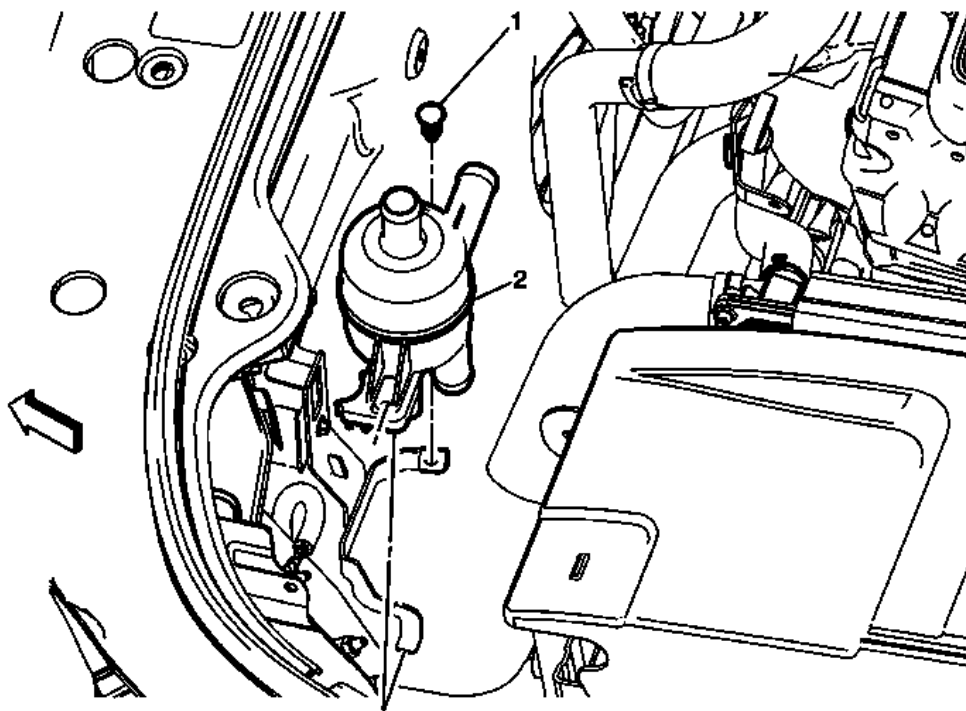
Drive Motor Battery Coolant/Air Separator & Retainer
